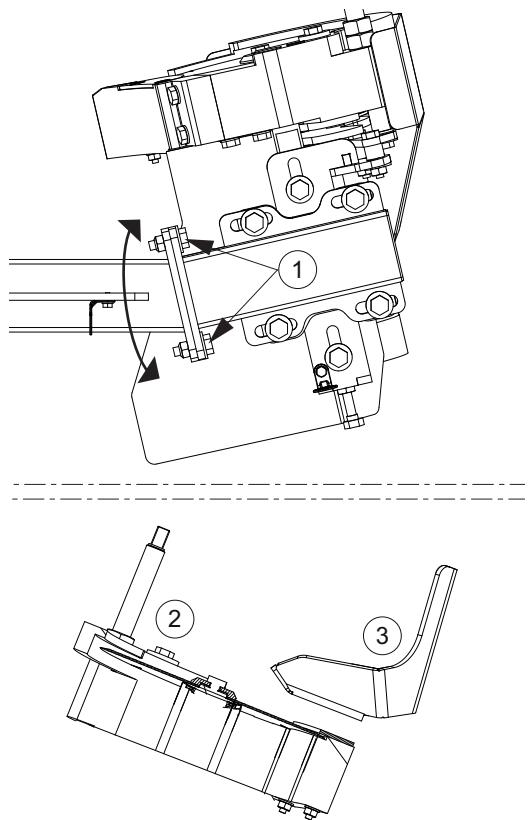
Adjust Neck Skin Cutting Module - parallel to shoulder lifter
